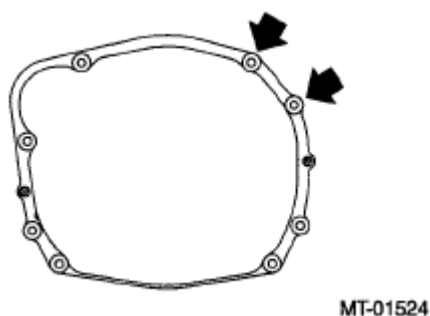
Locating Upper Side Of Transmission To Engine Bolts - MT Model
